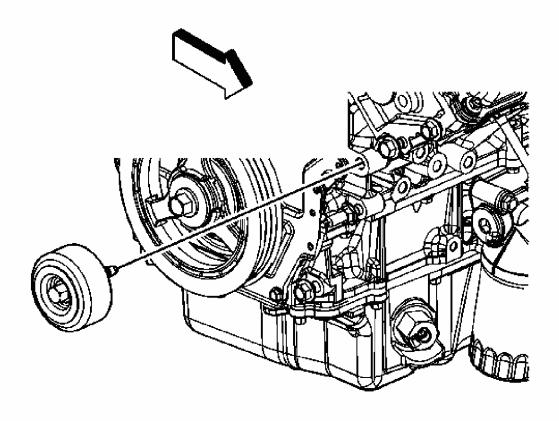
Identifying Drive Belt Idler Pulley Courtesy of GENERAL MOTORS CORP.
